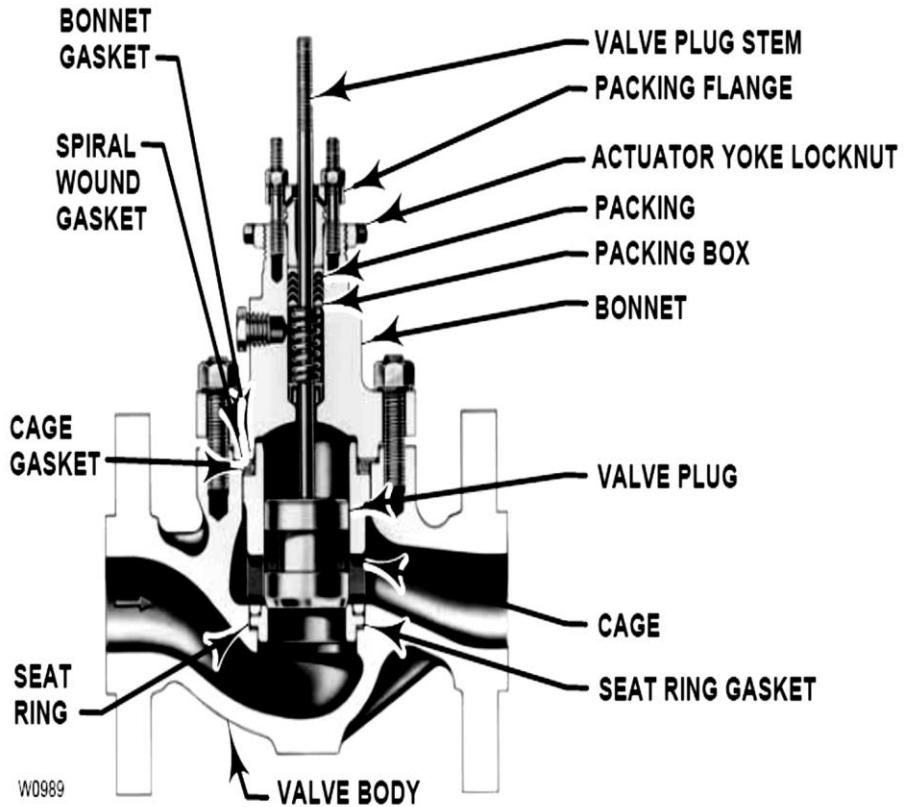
Typical example of Control Valves showing the actuator and valve body:
